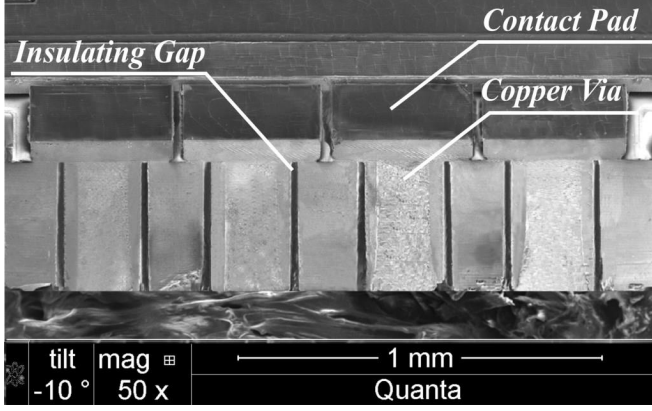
Cross-section of several vias, uniformly filled with copper.
